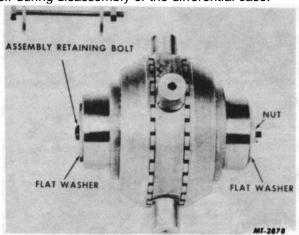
Inserting Assembly Retaining Bolt DISASSEMBLY
